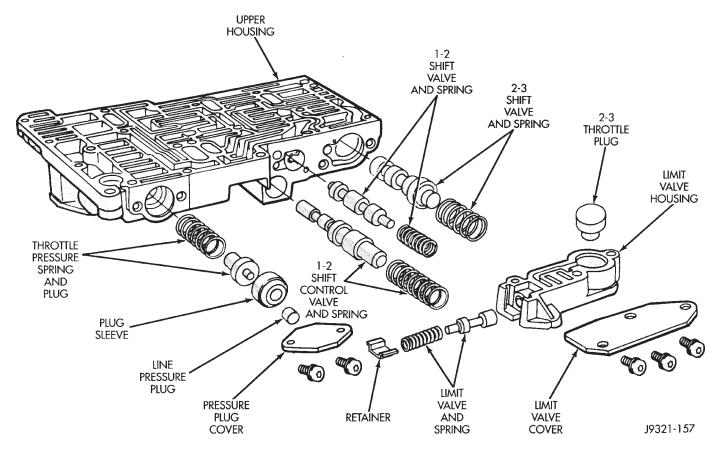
Upper Housing Shift Valve And Pressure Plug Locations
